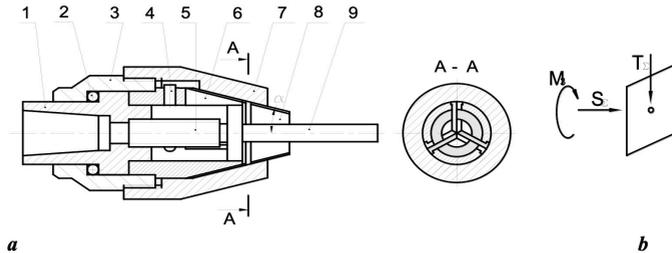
Wedge self-clamping drill chuck without a key (a) and the diagram of the power flow in it (b): 1 - case; 2 - balls; 3 - cylinder bushing; 4 - pin; 5 - screw with left-hand thread; 6 - separator; 7 - conical bushing; 8 - wedge cams; 9 - tool (drill)
